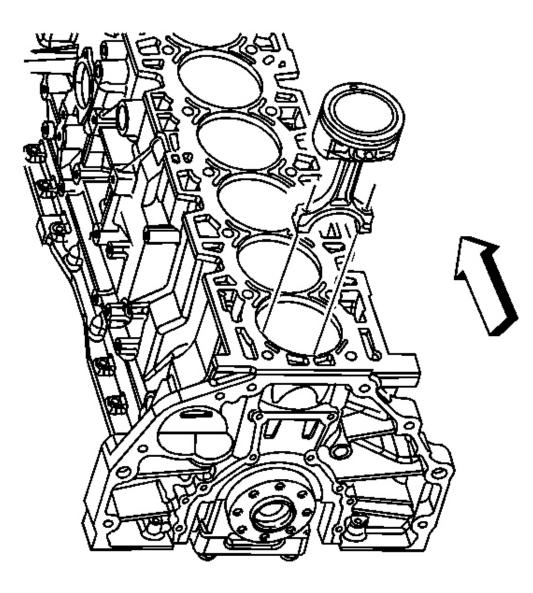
View Of Connecting Rods & Caps Courtesy of GENERAL MOTORS CORP.
